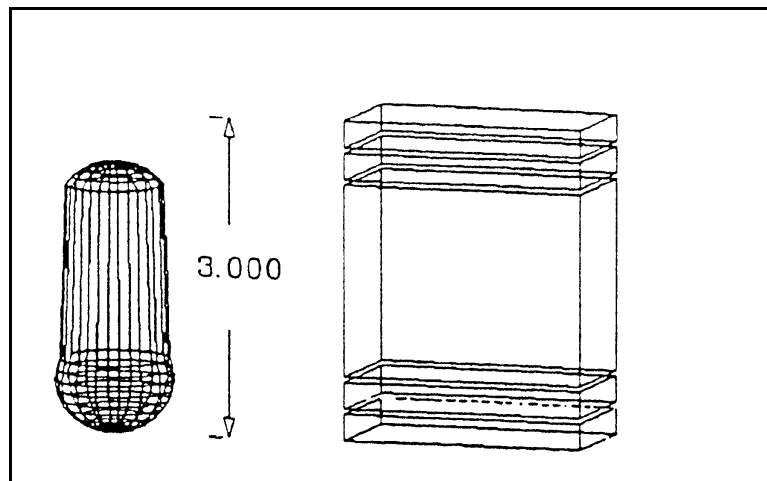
FIXED Z-TICAL DIMENSIONS AFTER
